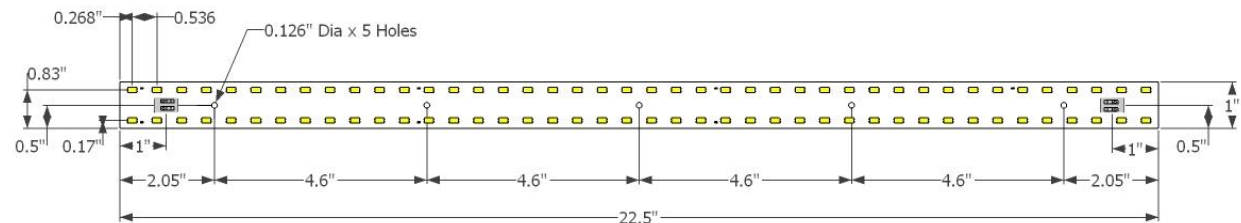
Q84SA-36V-2252 Mechanical Drawing
